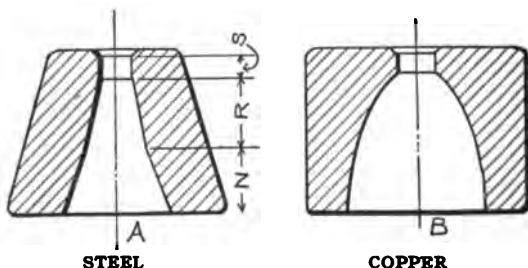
SEC. 10m.—Sections through steel and copper wire drawing dies.
